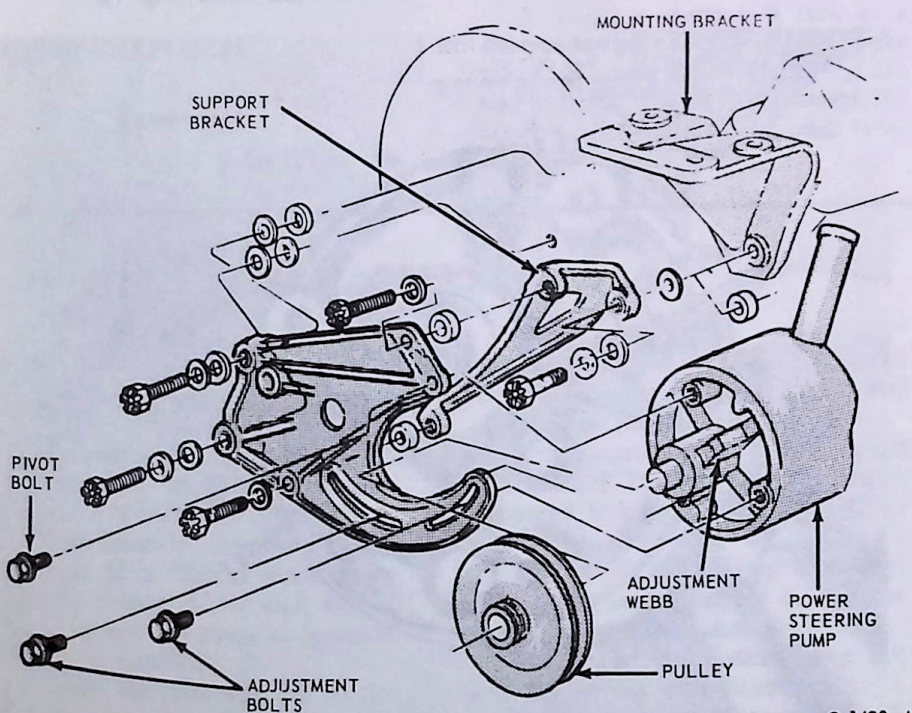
Power Steering Pump Installed—Ford-Thompson
